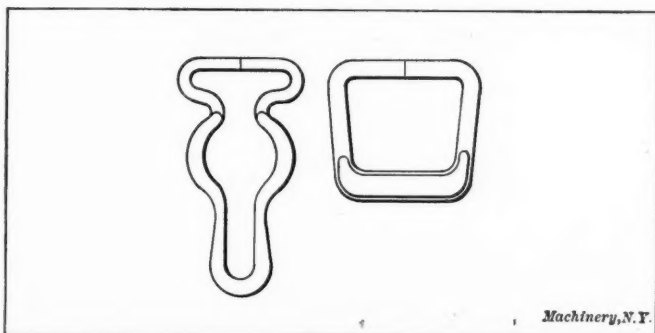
Examples of Work Done on Machine shown in Fig. 1
